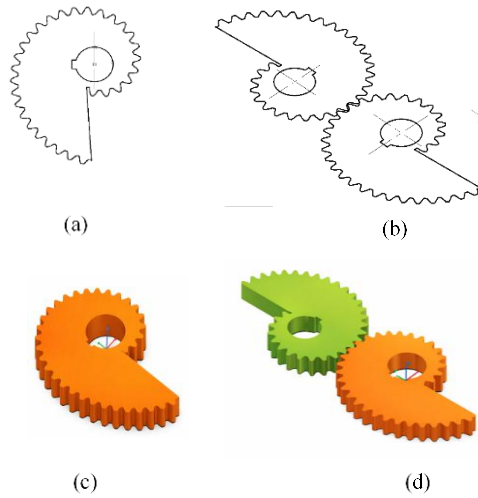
Geometric models of the logarithmic spiral spur gear: (a) 2D gear profile, (b) 2D view of the gear pair, (c) 3D model of a single gear, and (d) 3D model of the gear pair
